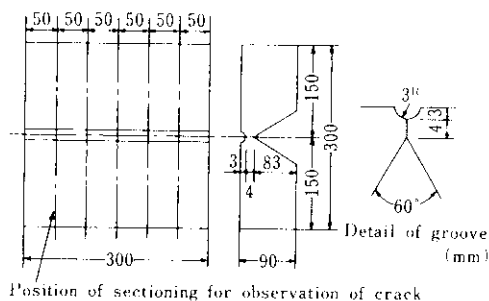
Shape and dimensions of restraint stress relief cracking test specimen (A Type)
